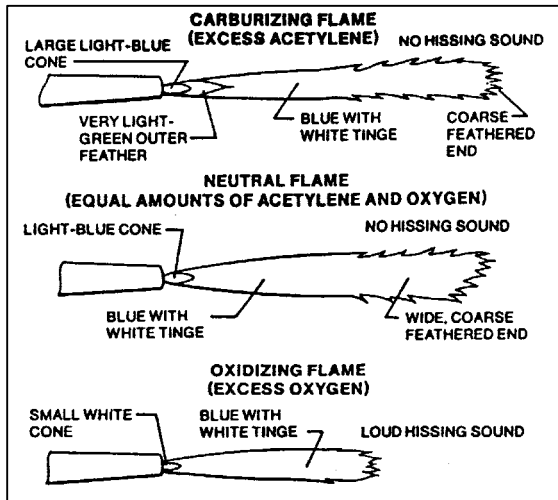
Basic gas-welding flames: Each has distinctive shape, color and sound. Neutral flame is the most used.
